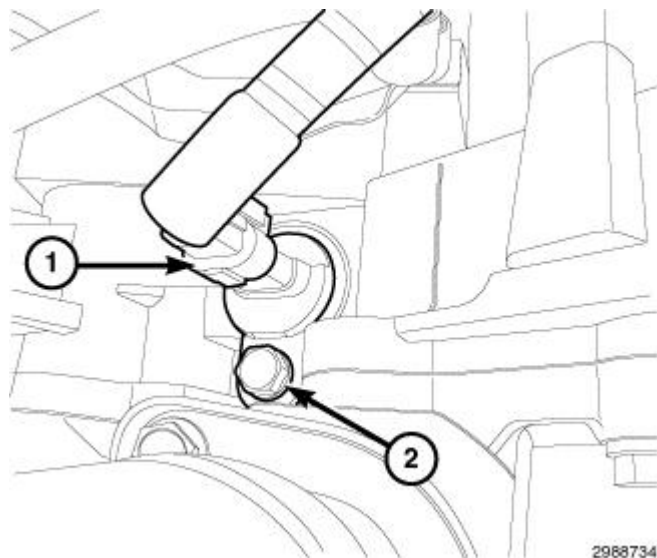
Camshaft Position Sensor Electrical Connector & Bolt
